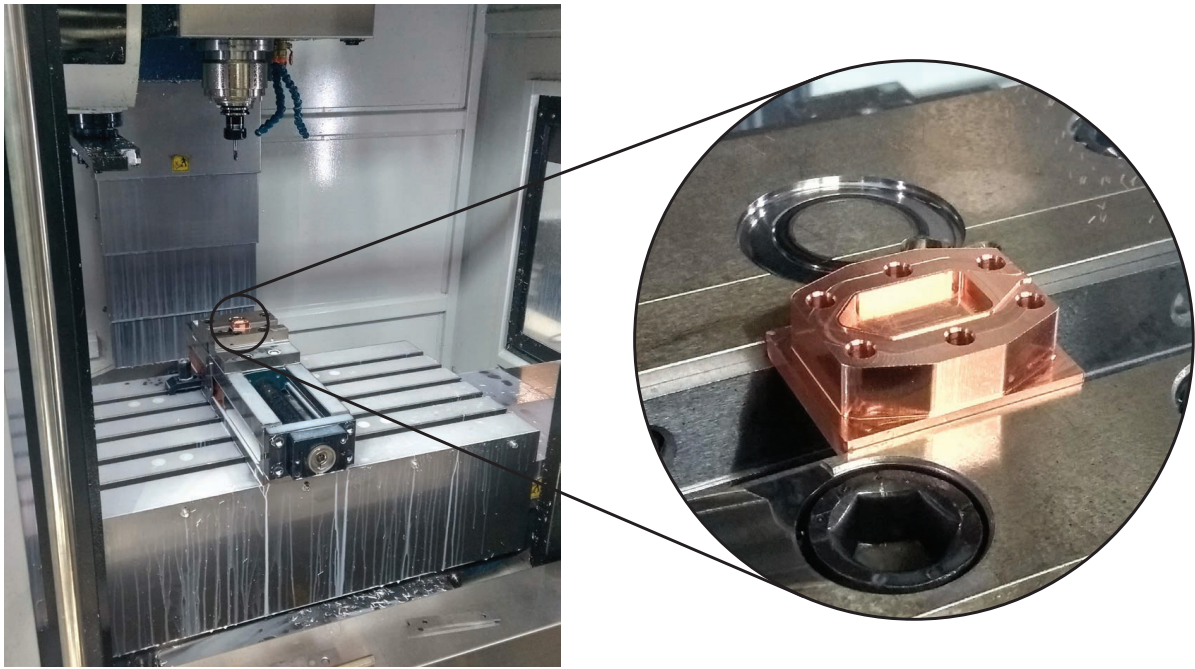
One of the thruster body copper blocks midway through CNC milling.
